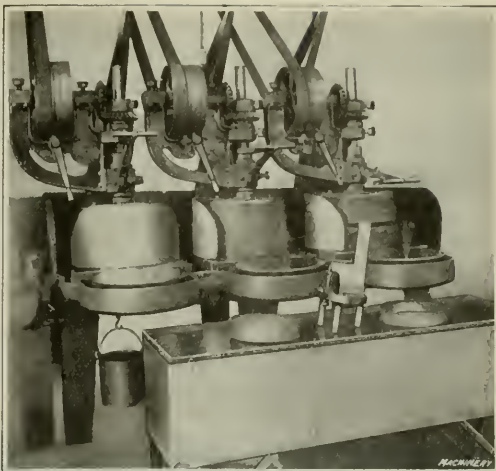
Oil-grinding Machines, which are one Type used for Finishing Steel Balls
